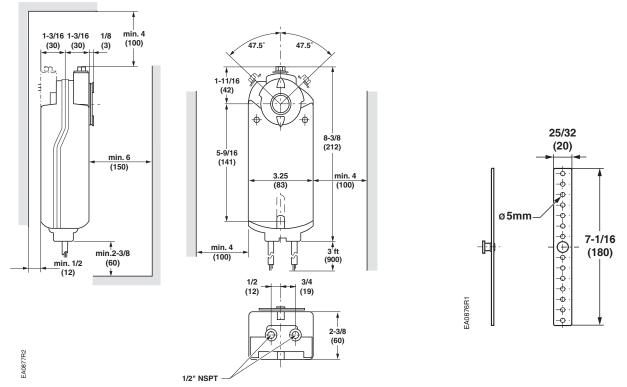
Dimensions of the DuraDrive Actuator and Anti-rotation Bracket in Inches (Millimeters).
